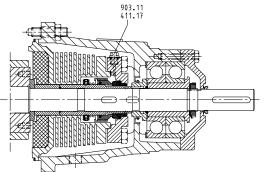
Vent plug for seal chamber (air-cooled seal housing) – Sizes 32 to 100
